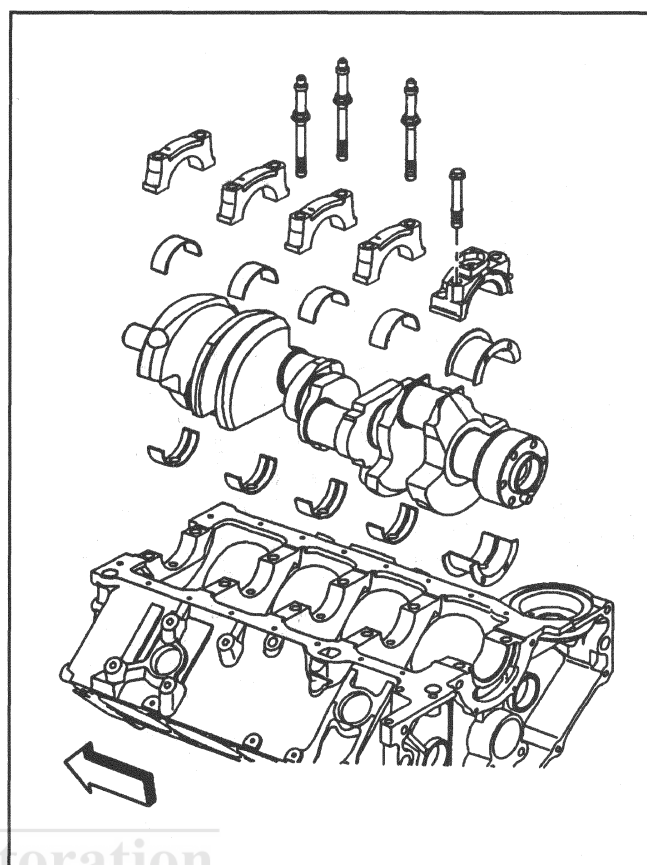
Crankshaft, Crankshaft Bearings, and Crankshaft Bearing Caps
